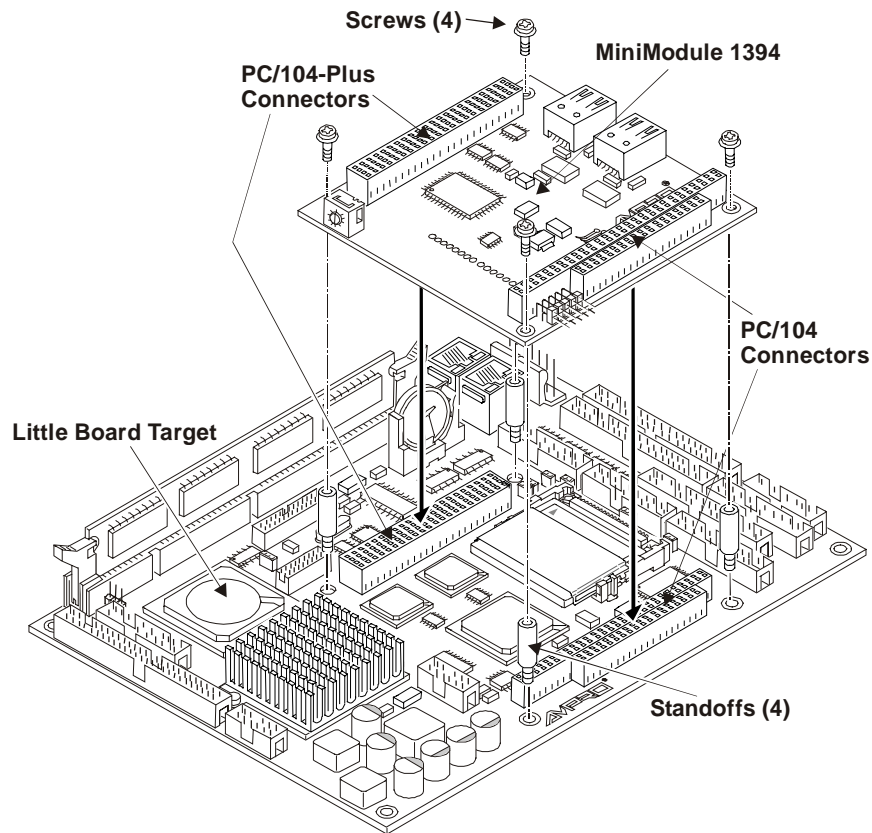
Installing MiniModule 1394 on Little Board Target
